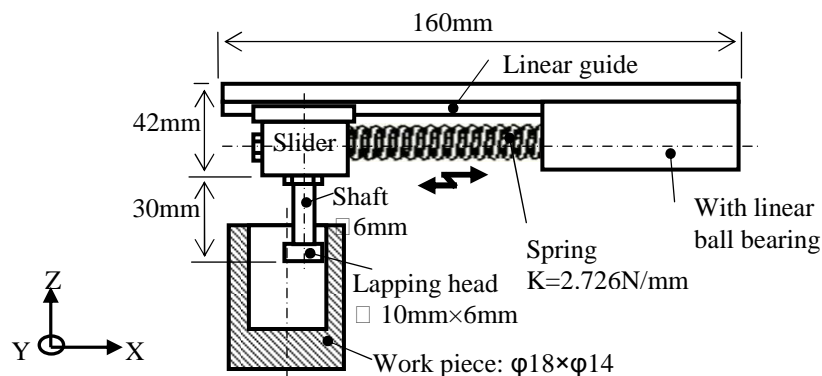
The schematic view of the lapping tool for mirror-like finish on cylindrical inner surface
